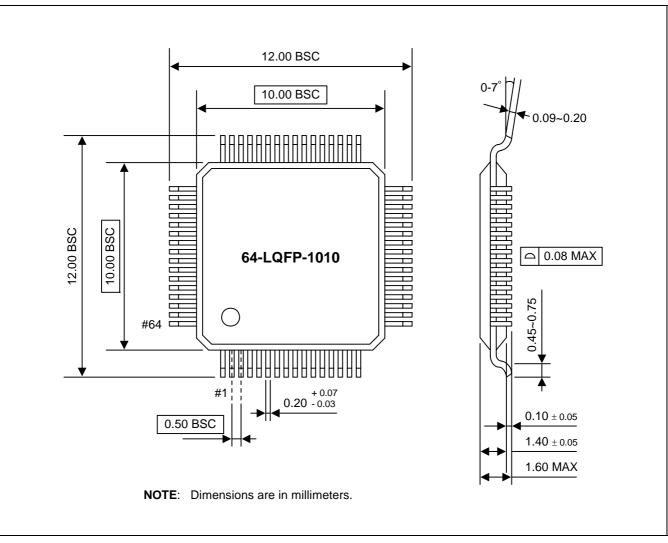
64-Pin LQFP Package Dimensions (64-LQFP-1010)
